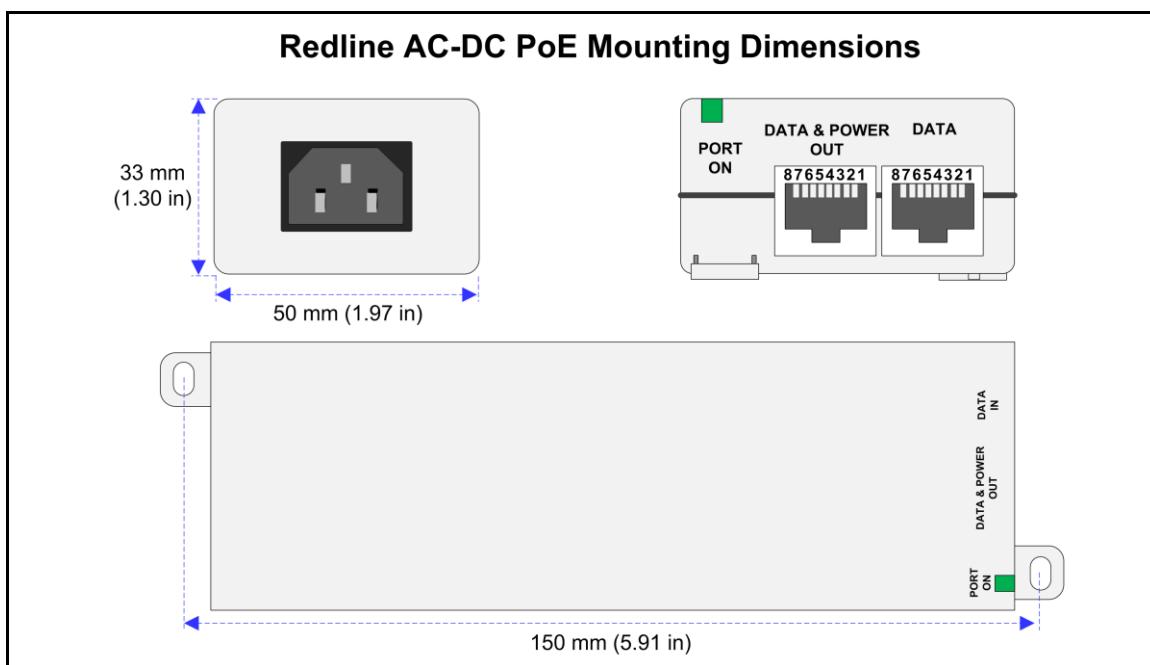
Reference: AC-DC PoE Mounting Dimensions
